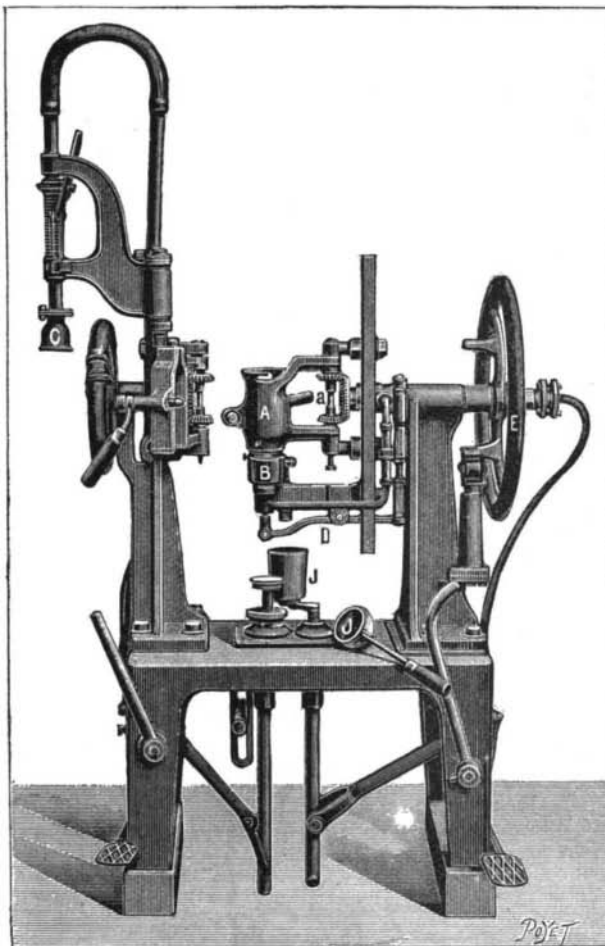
THE BOUCHER MACHINE FOR THE MANUFACTURE OF BOTTLES READY FOR THE RECEPTION OF THE MOLTEN GLASS.
